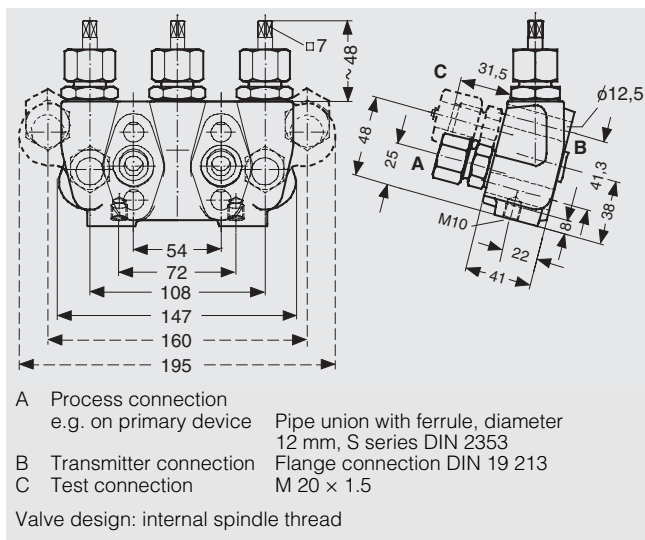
/70 Three-way valve manifold DN 8 with pipe union, dimensions
